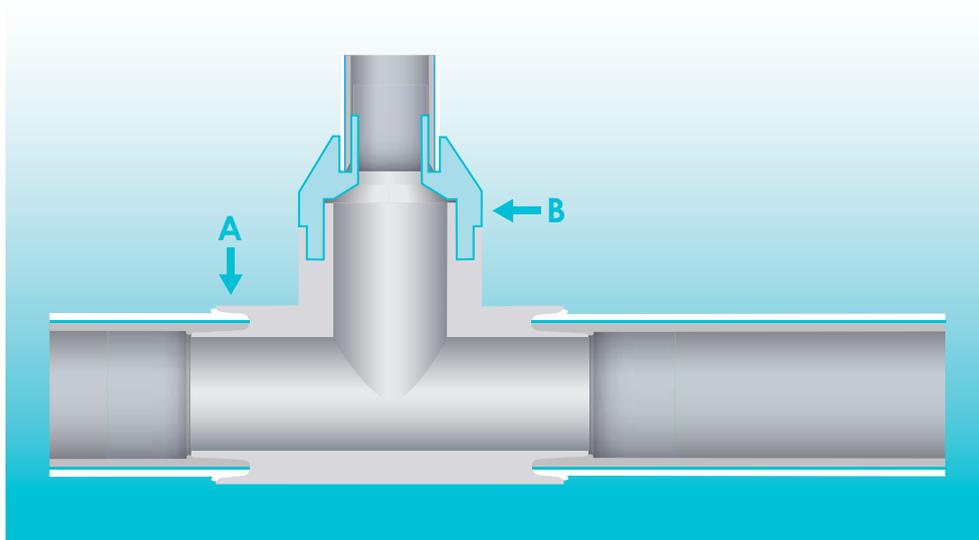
Welded WRW welding system tee piece in cross section
